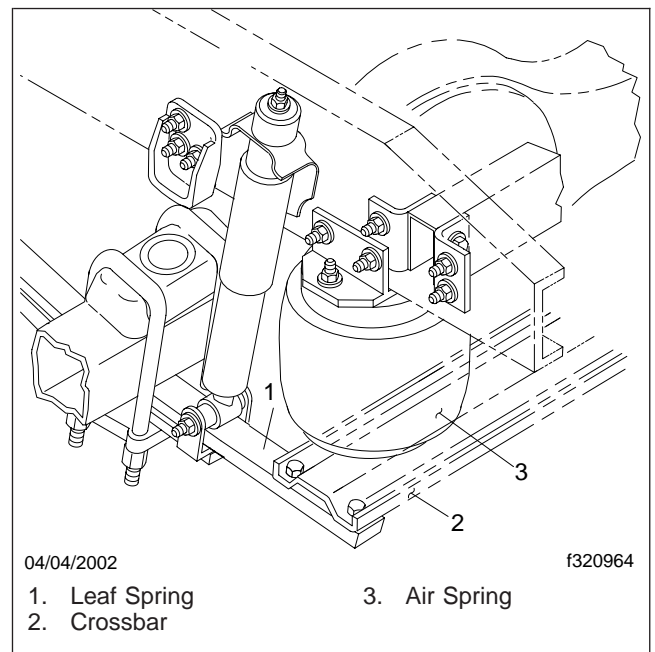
, Leaf Spring and Air Spring Assembly (23,000 and 46,000- pound suspensions)
